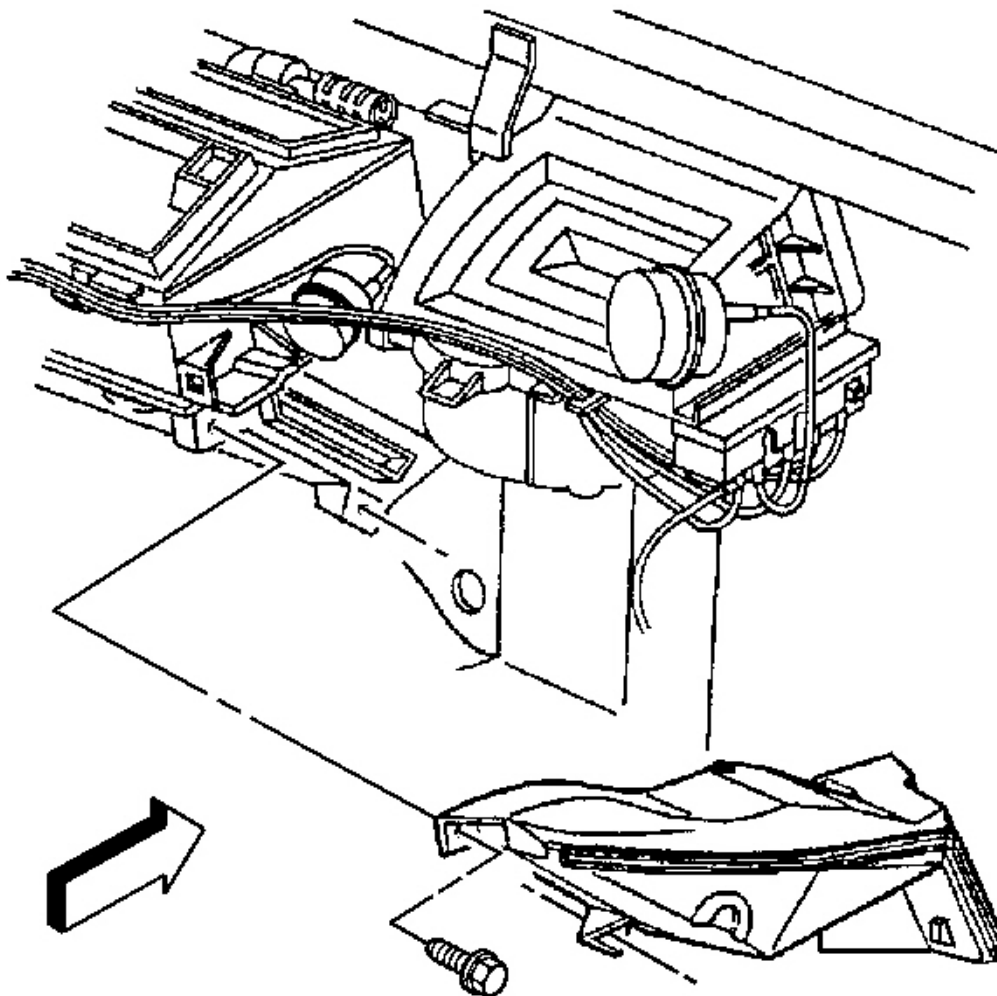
Floor Air Outlet Duct, Upper Half & Screws
